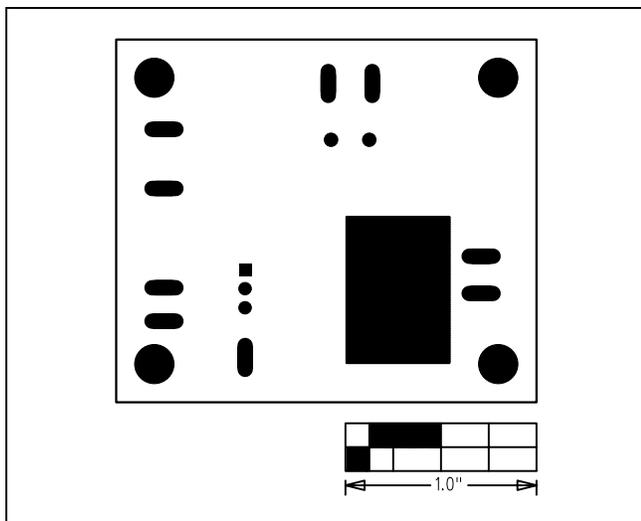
MAX17502F EV Kit PCB Layout—Bottom Solder Mask
